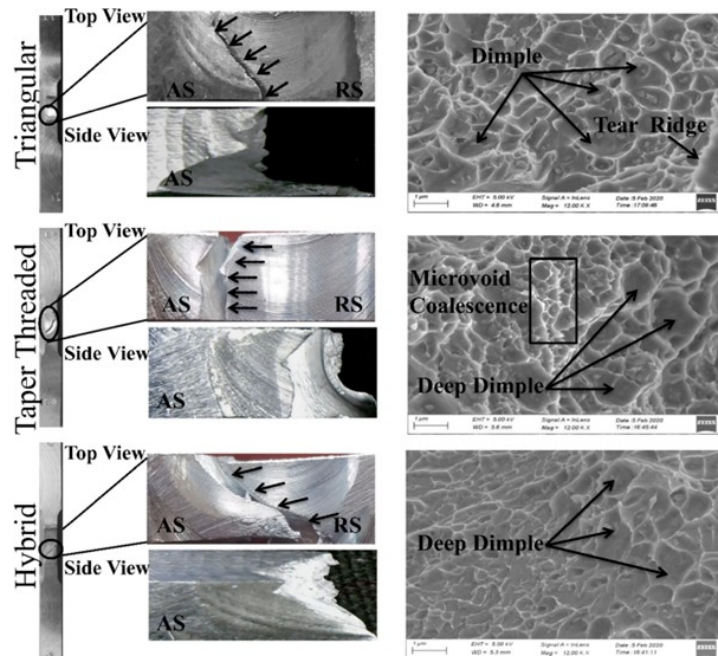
Tensile fracture of welded samples using different tool pin profiles [9].
